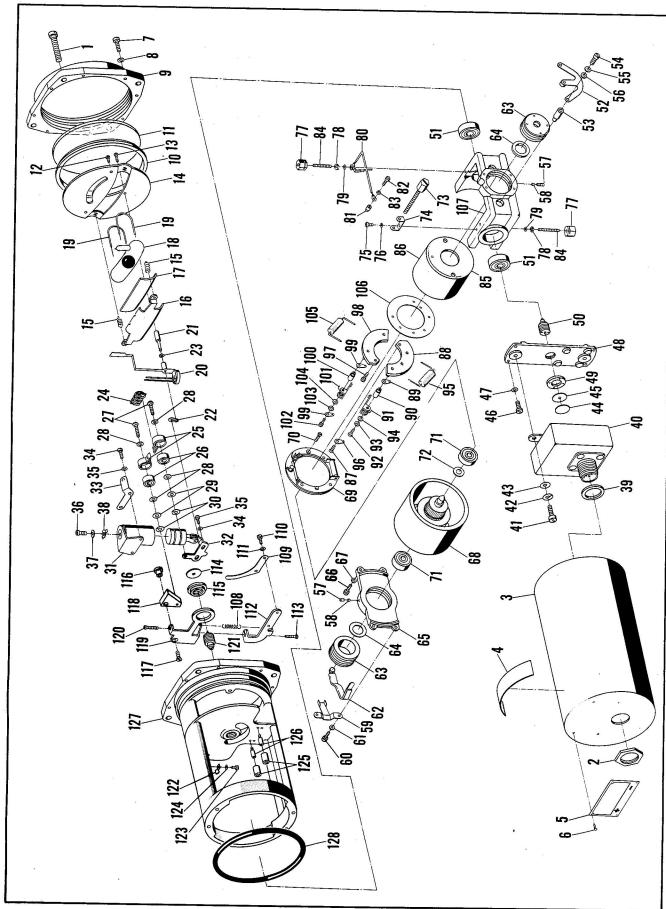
Bank and Turn Indicator Assembly, Model B4B
